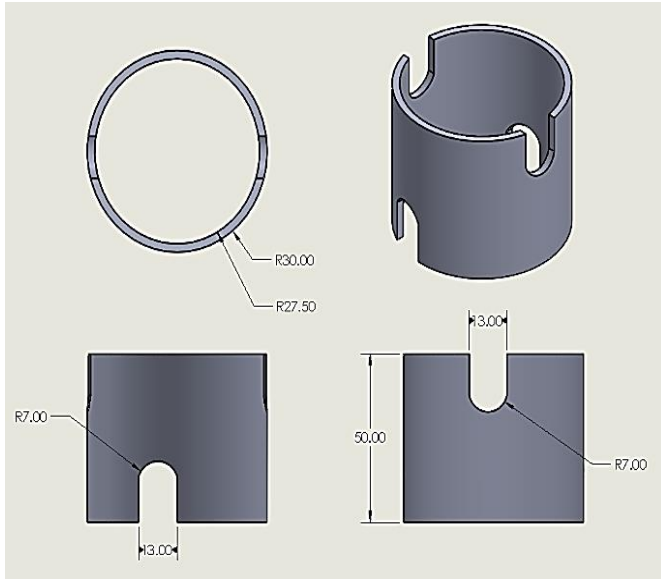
Test sample 3 (hollow cylinder) design and dimensions
